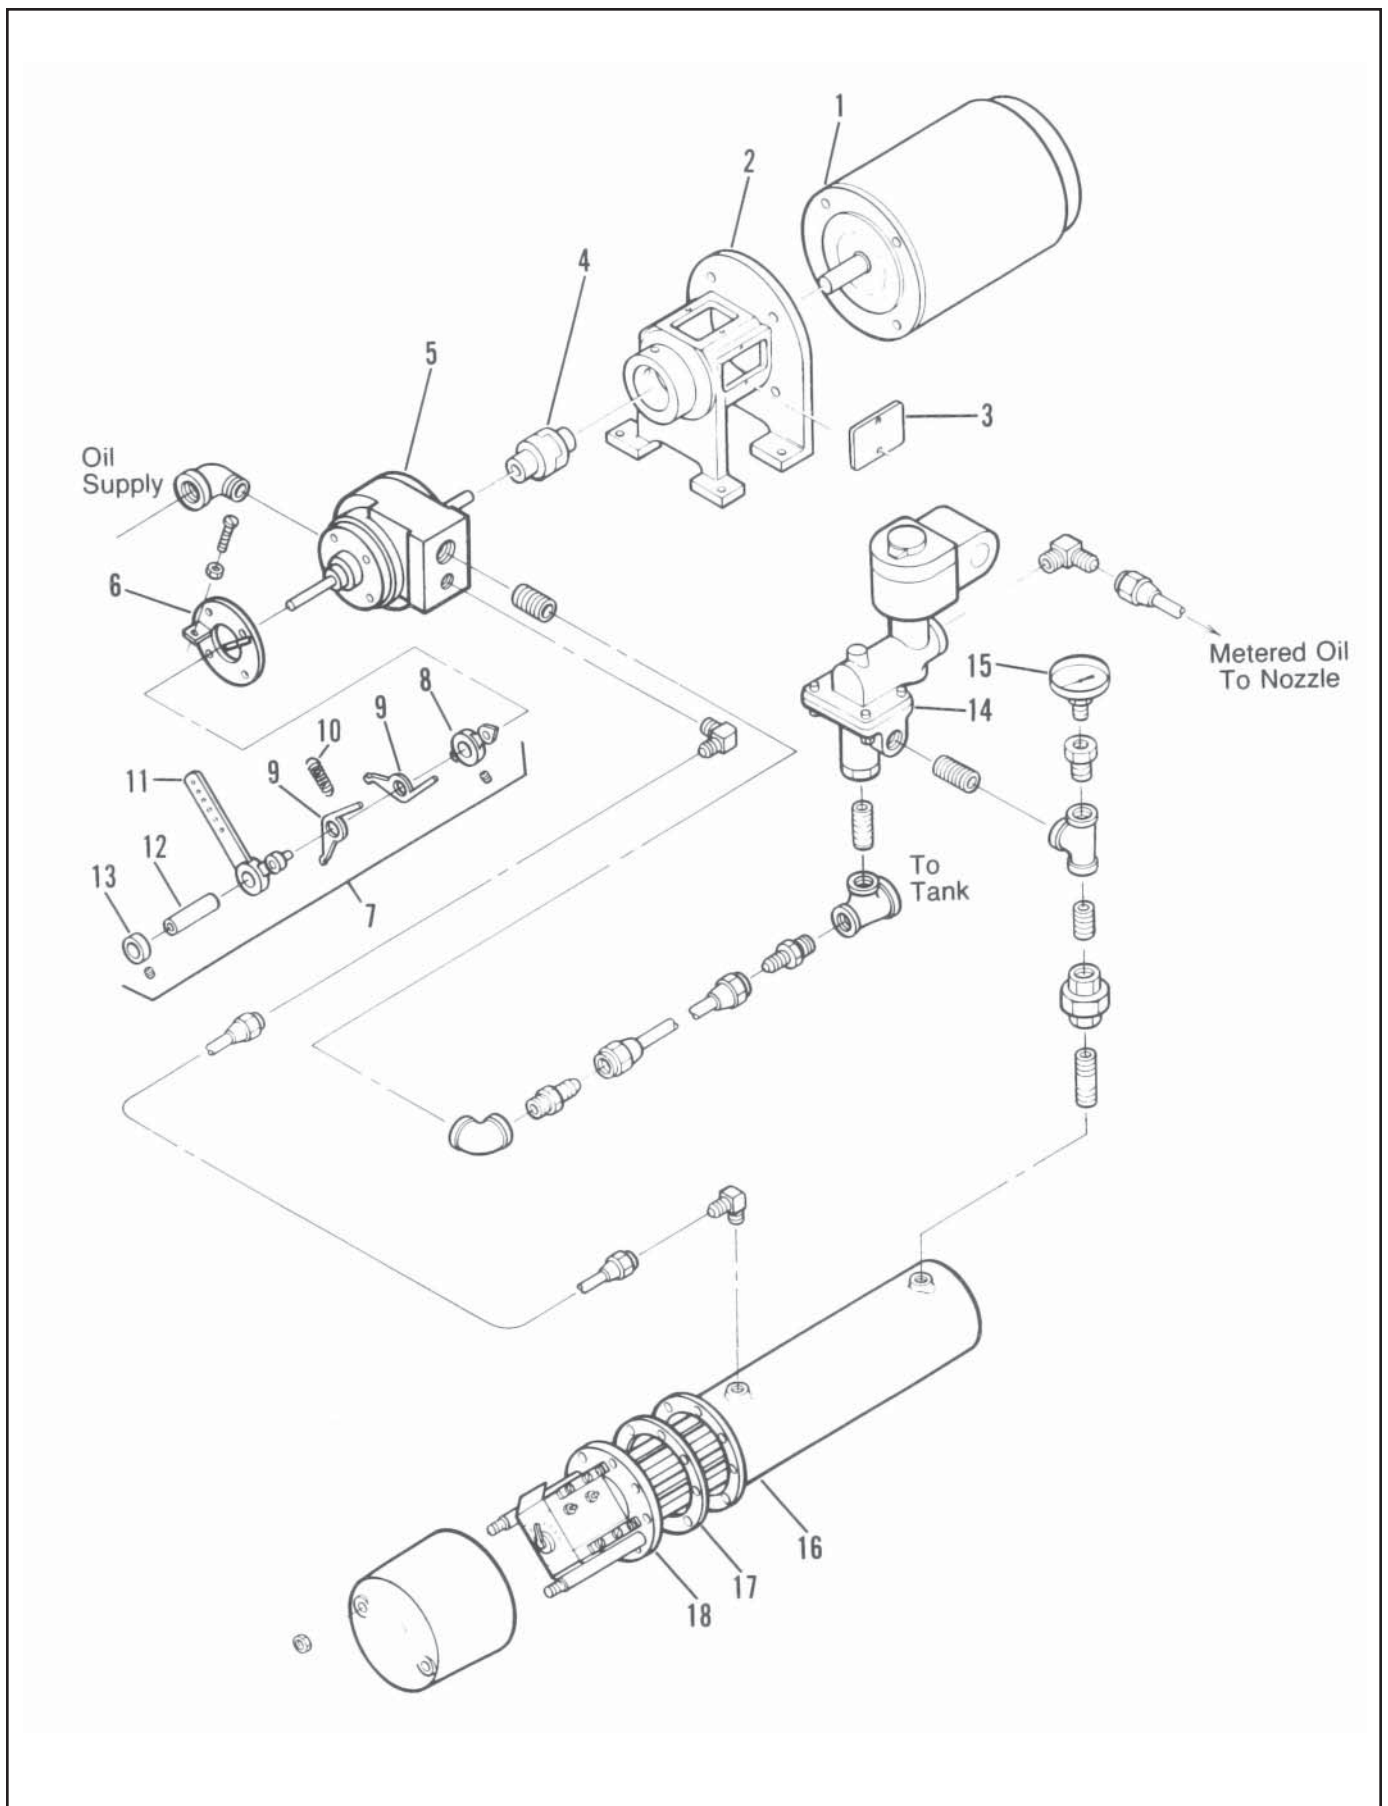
OIL PIPING ASSEMBLY, AIR ATOMIZING - ME34-105
